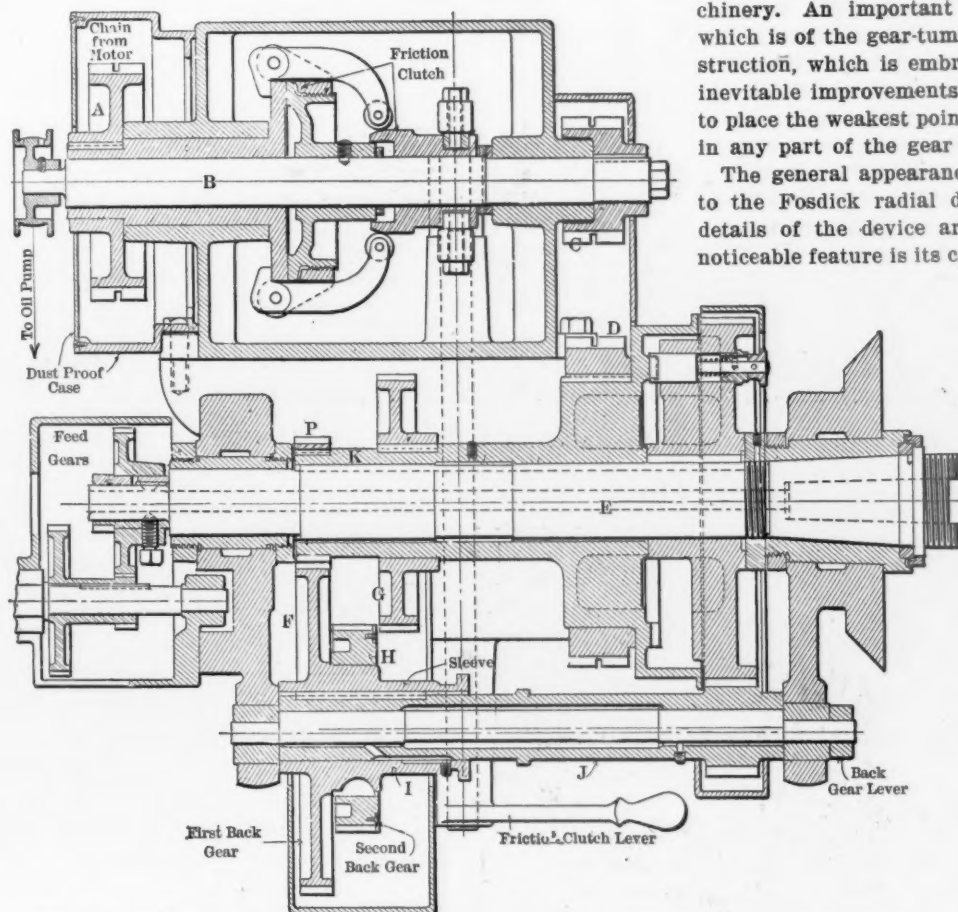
HORIZONTAL SECTION THROUGH SPINDLE OF THE NEW MOTOR-DRIVEN CINCINNATI MILLER, SHOWING DETAILS OF CLUTCH, DOUBLE BACK-GEARS, ETC.
